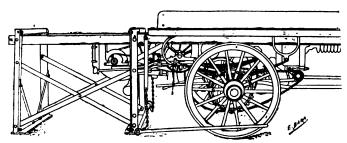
VIEW OF ARRANGEMENT FOR REMOVING MOTOR AND TRANSMISSION GEAR IN THE PANTZ MOTOR-VEHICLES.
